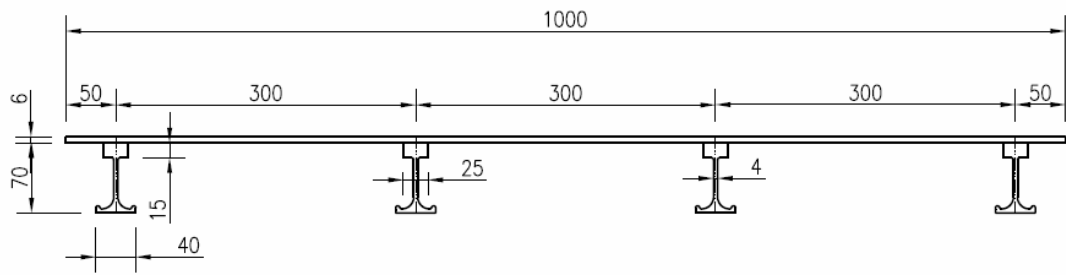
(b) Layout of test structure 18D for friction stir lap-joining in mm
